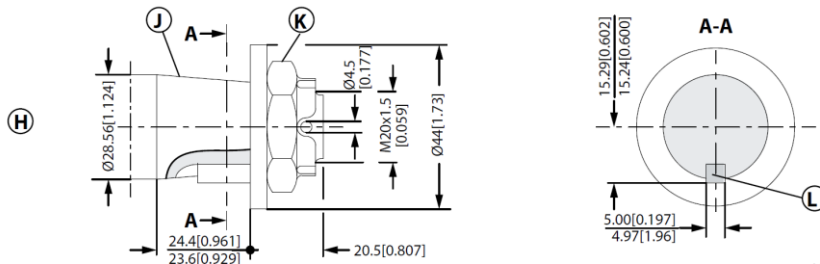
OMR shaft version: Tapered shaft 28.5 mm; ISO/R775 (taper 1:10)
